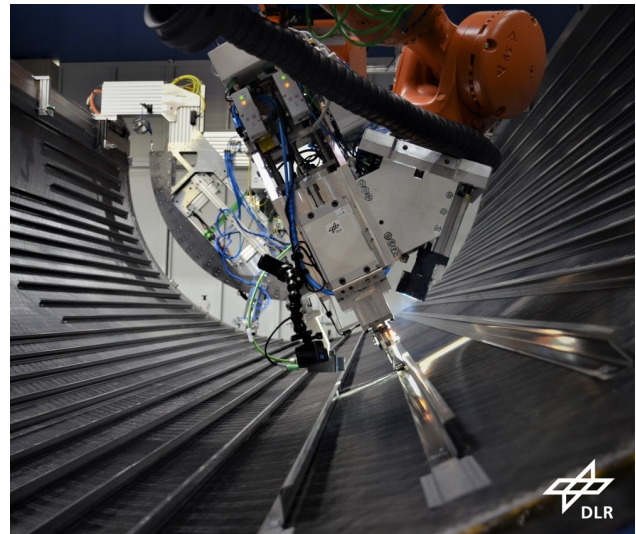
Path correction of welding seam track during robotic ultrasonic welding on the Multi Functional Fuselage Demonstrator at DLR in 2023. Image modified from [34].
